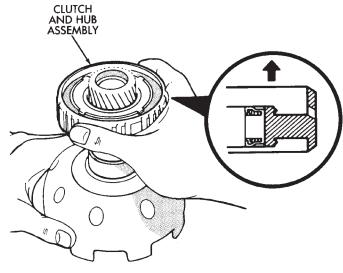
Installing Clutch And Hub Assembly On Sun Gear
